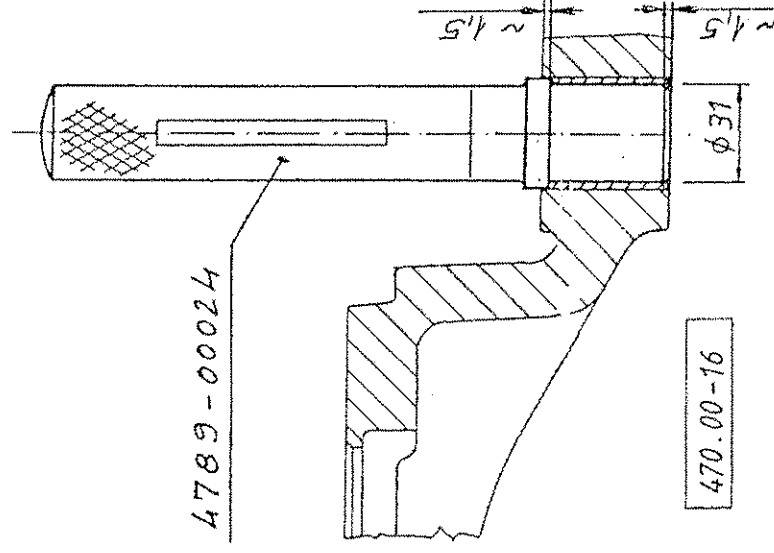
PRESSING THE BUSHINGS IN AND OUT
